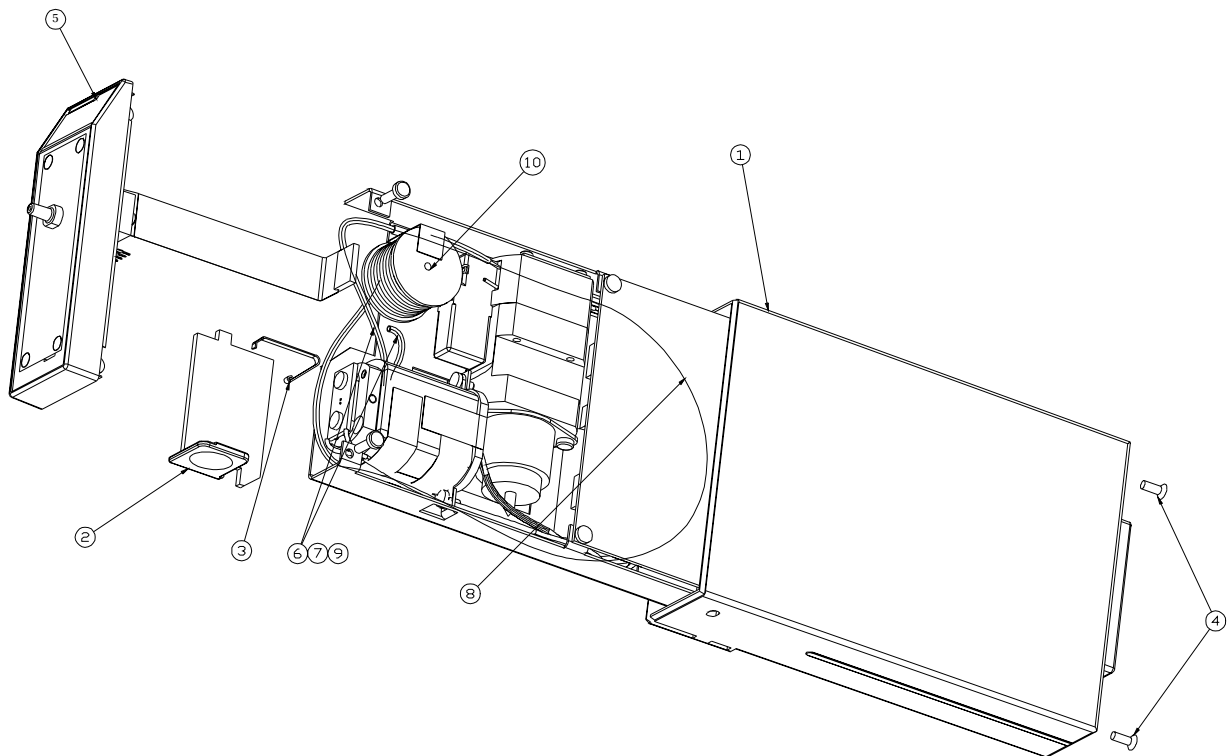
Exploded view of S/5 Tonometry Module, M-TONO
